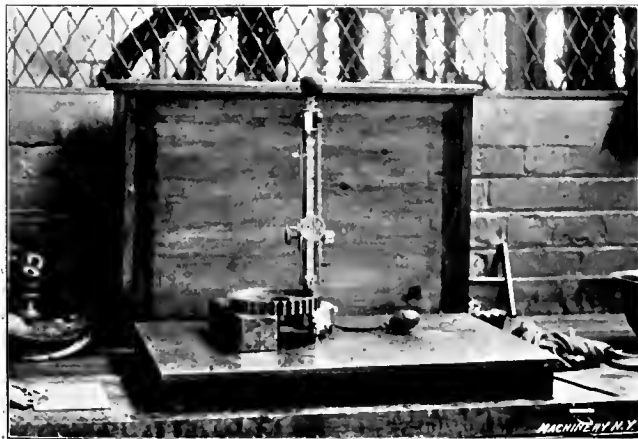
Testing the Hardness of a Gear with a Scleroscope
